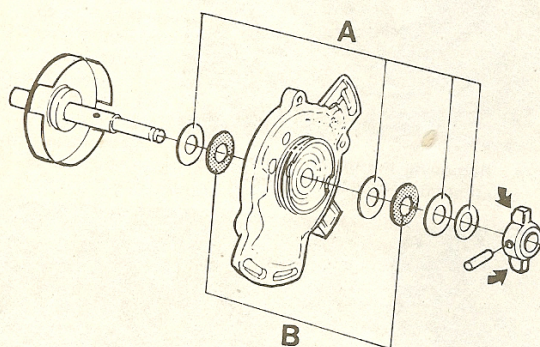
EZ 115-117K distributor shaft components (Sec 5)
